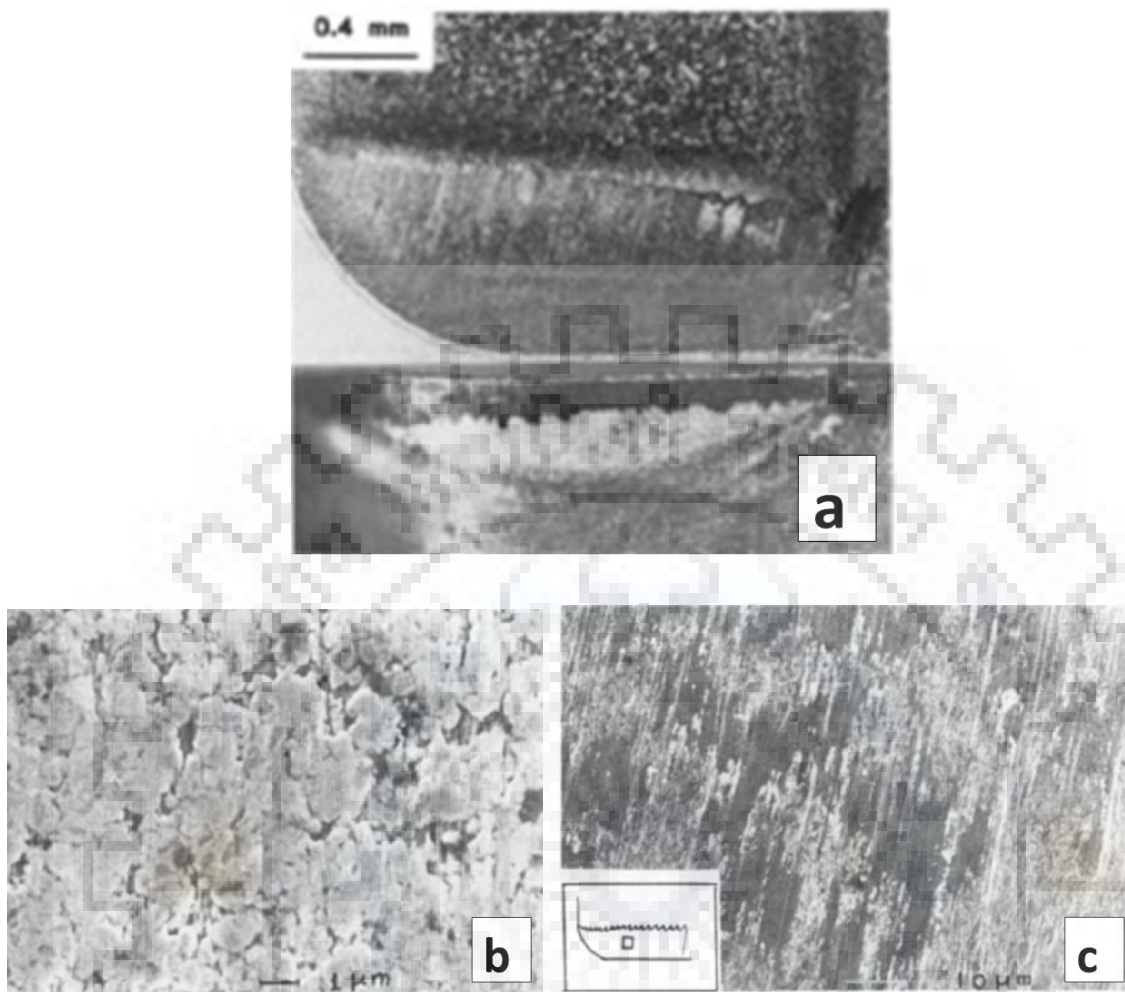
(a) Appearance of worn Ti(CN) based cermet tool after machining steel (b) rake surface very near cutting edge - no sticking layers or abrasive tracks (c) crater region showing sticking layers and abrasive tracks [Thoors et al., 1993].
